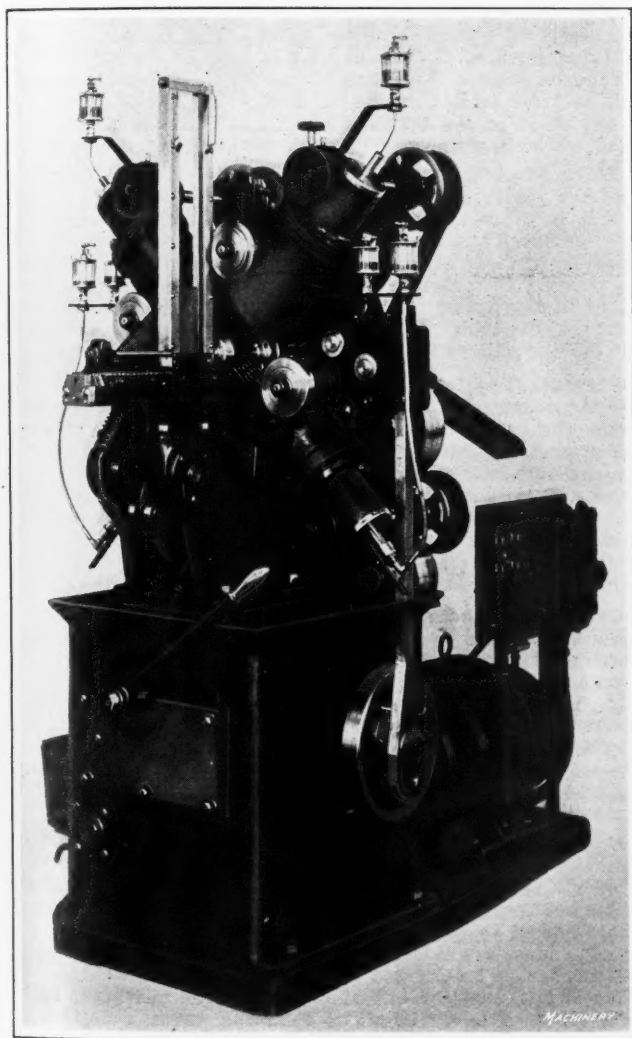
Langelier Automatic Ignition Tube Drilling Machine
